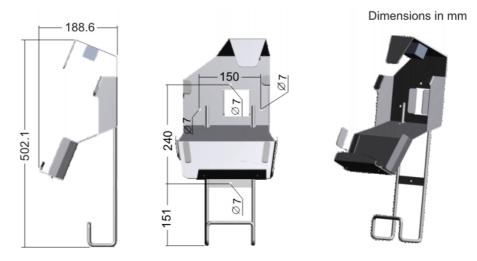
Dimensions and drilling locations for smartPAD holder
